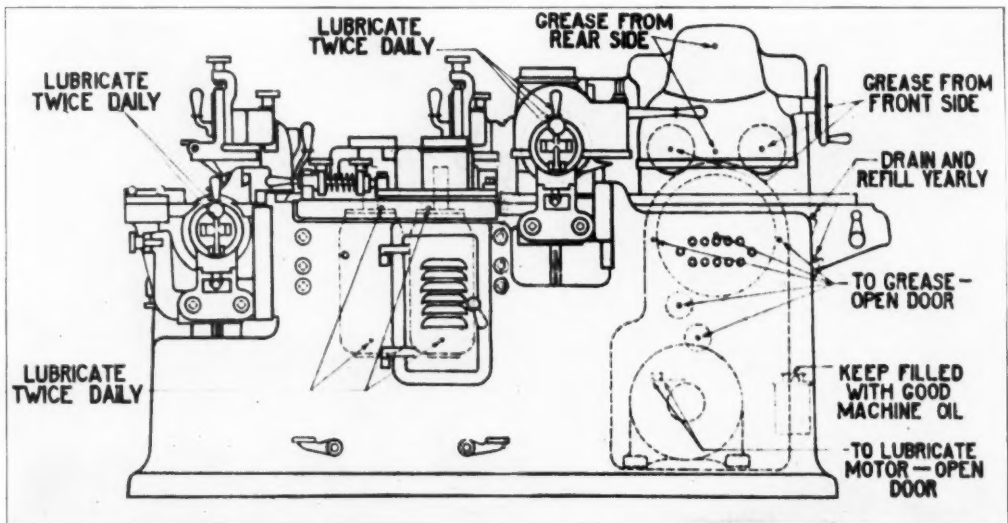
Lubrication chart for an electric molder showing parts to be lubricated and frequency.
